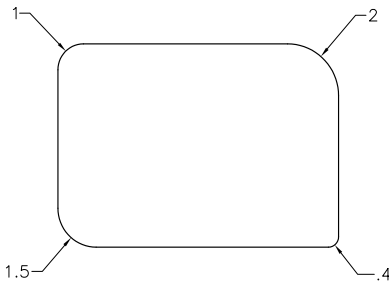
Rectangle filleted using different radii with the Equal button deactivated
